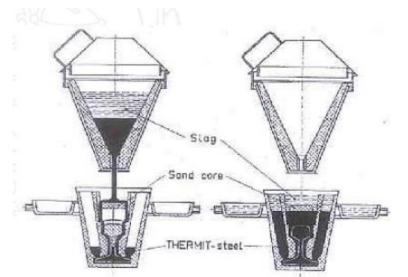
Aluminothermic Weld Components. Source: Pr. Dr. Telmo Giolito Porto
